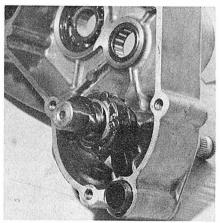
Kickstarter rollers may be held in place with grease to aid installation of gear (25—Fig. HK10).
